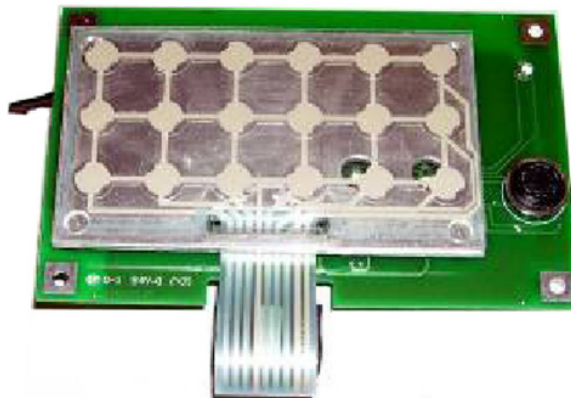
V-4041-K Controller, Keypad/Radiometer Interface Board
